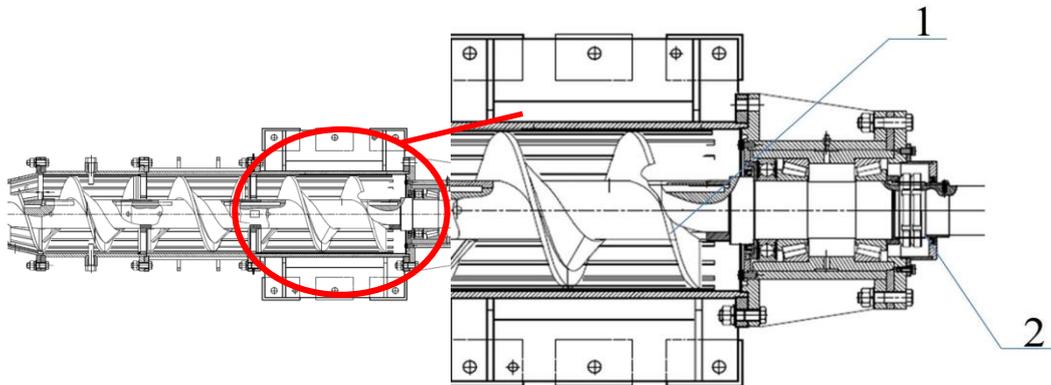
The most common deformed elements of the auger machine when clogged: 1 – weld location of an auger head and shaft, 2 – box coupling on the rotation shaft
